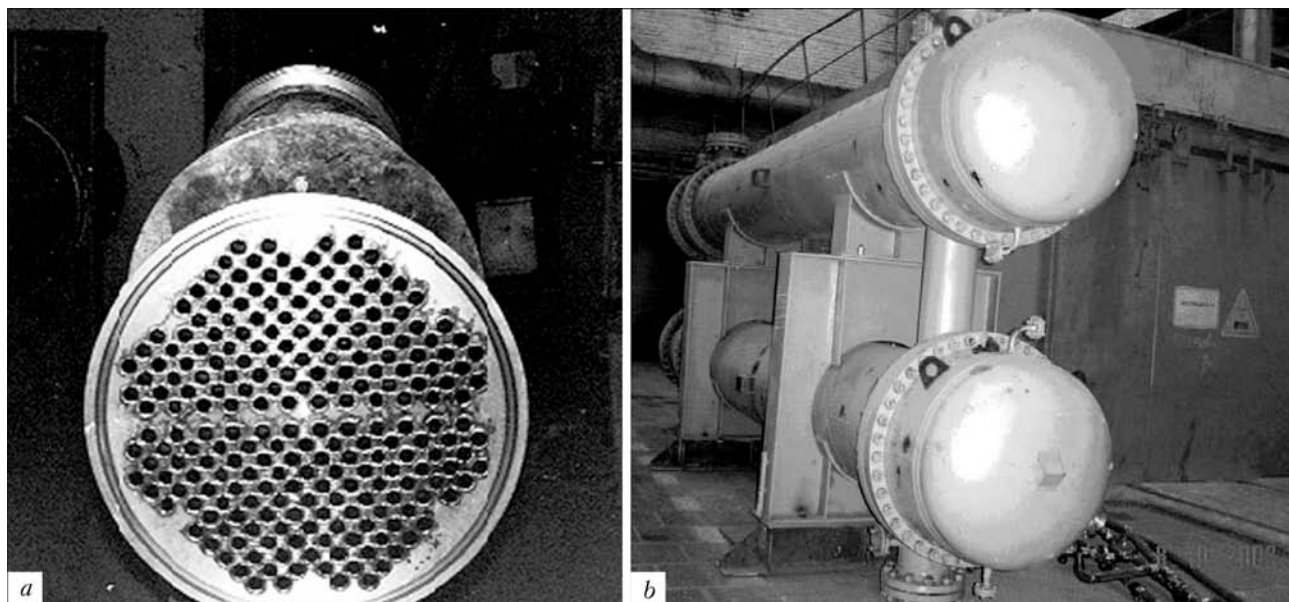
Explosion welded bimetal tubesheet of heat exchanger of «Leningradskaya» NPP (a) and bimetal cooler of gas-condensate equipment («Volgogradneftemash», RF) (b)
